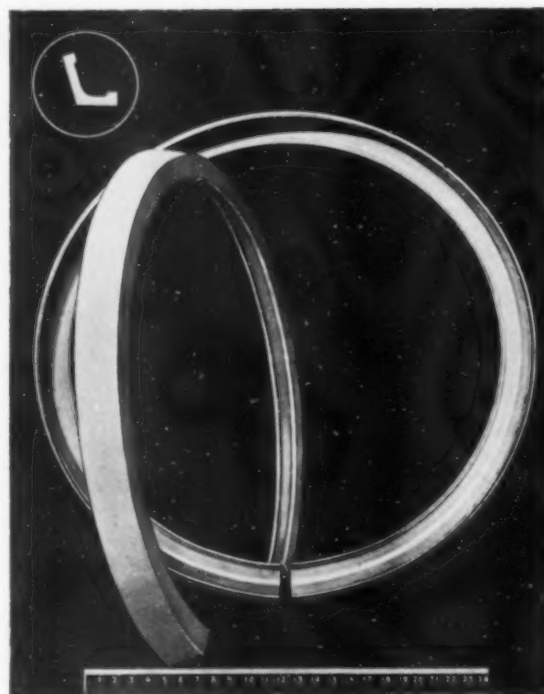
Engine mounting ring circled from section shown in top left-hand corner.
